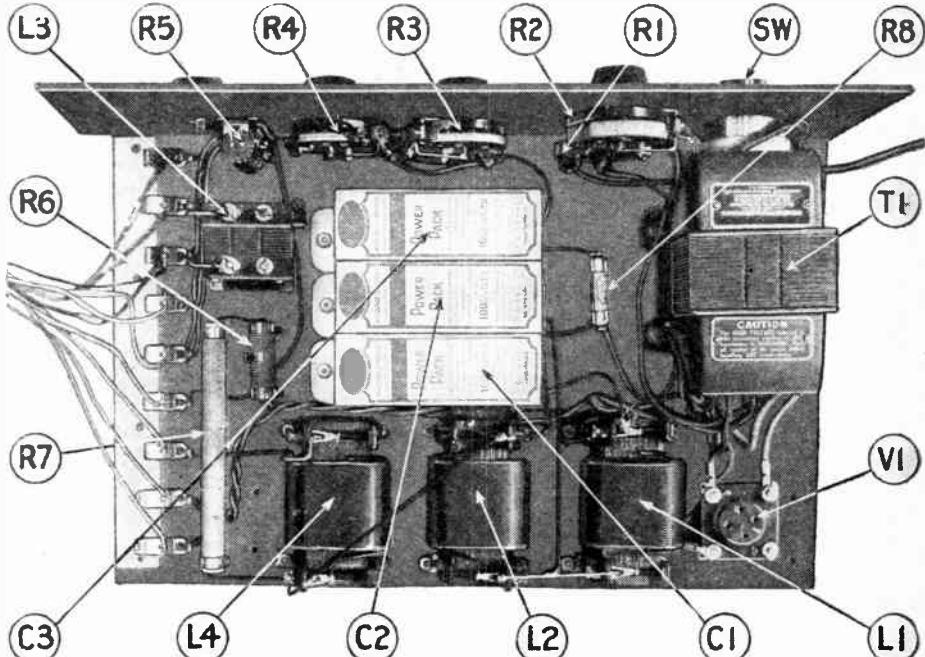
Fig. B. The exact position of all parts mounted on the baseboard is shown in this top view of the power unit. T₁, power transformer; V₁, tube socket; L₁ and L₂, filter-choke coils; L₃, detector "B" choke coil; L₄, output choke coil; C₁, C₂ and C₃, filter condensers; R₆, R₇ and R₈, fixed resistors; R₁, R₂, rheostats; R₃, R₄, grid-bias resistors; R₅, "B+Det." control.
